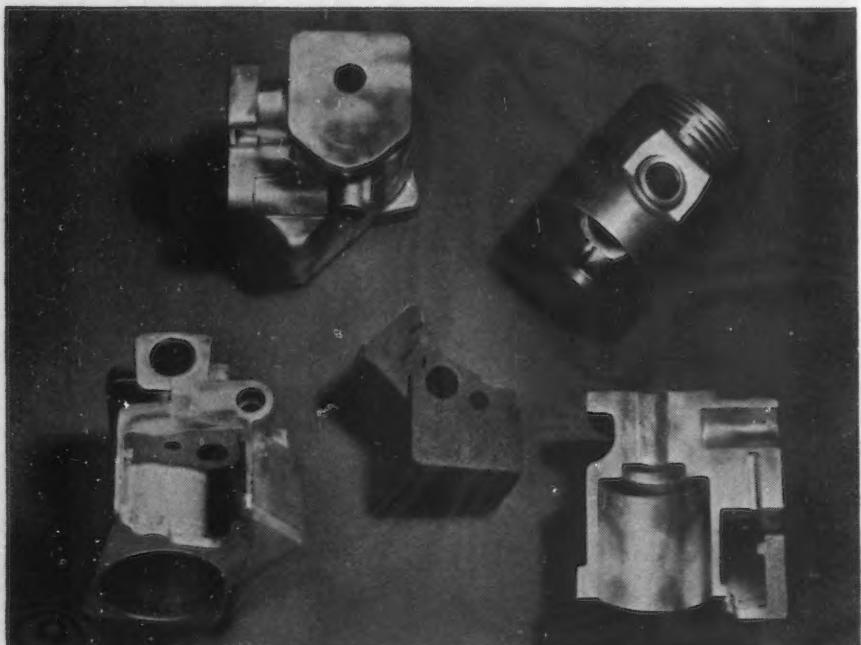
A governor case cast in a semi-permanent mold. The core shown is used to form the recess visible in the lower left hand view. This casting is produced in the mold illustrated.
